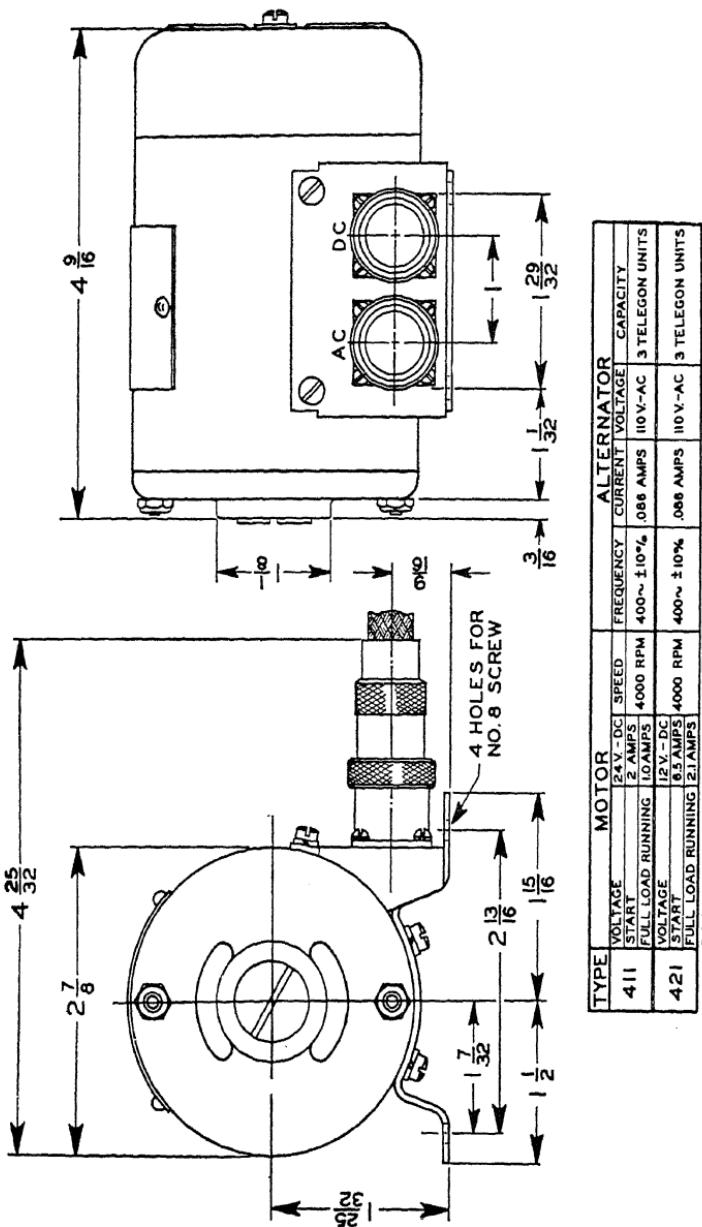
Installation Dimensions of Dynamotor and Electrical DC and AC Plug Connections
